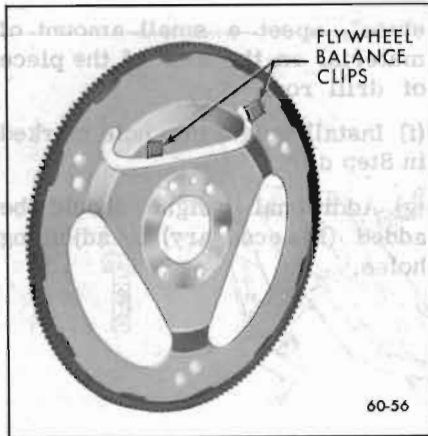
Automatic Transmission Flywheel Balance Clip Locations
